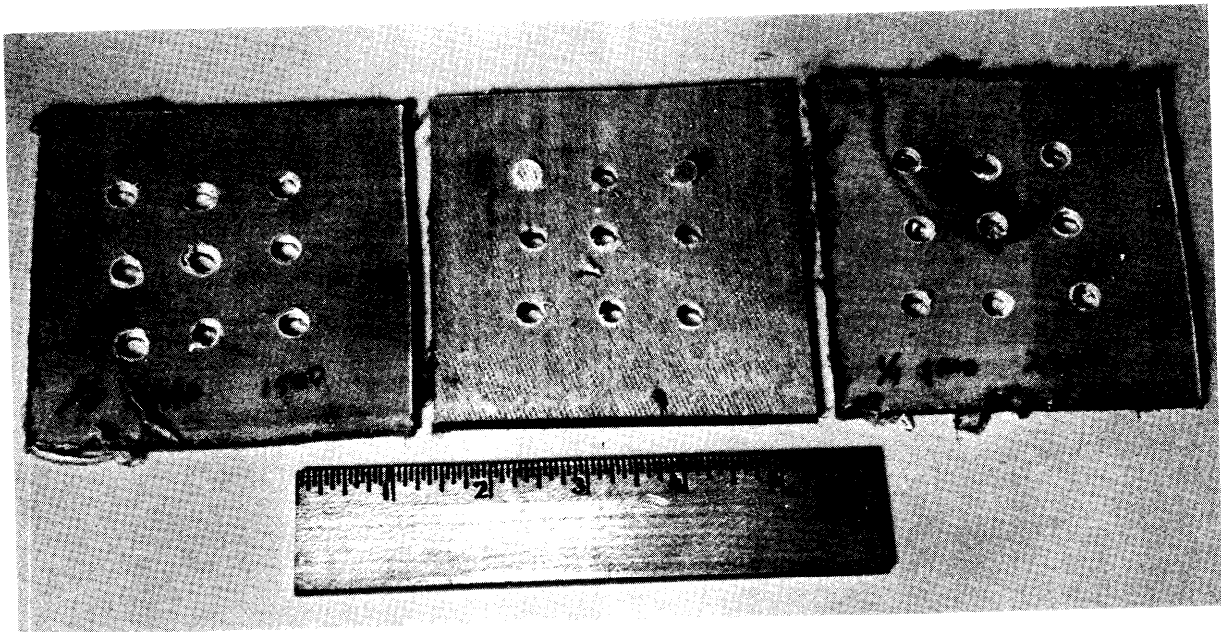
DRILL: .250 SPADE DRILL
